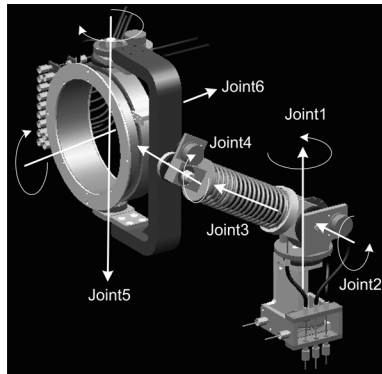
Front view on the shoulder-assembly (3D Catia model)
